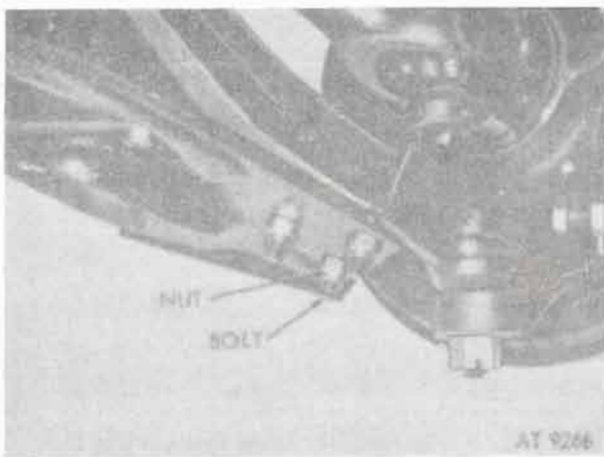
Right spindle support lower ball joint and attaching hardware.
